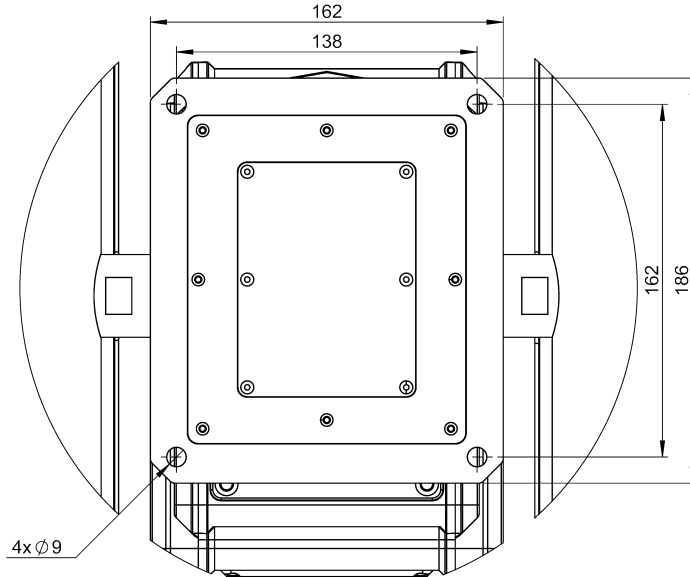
FLIR A3xx pt series camera mounting (mm)
